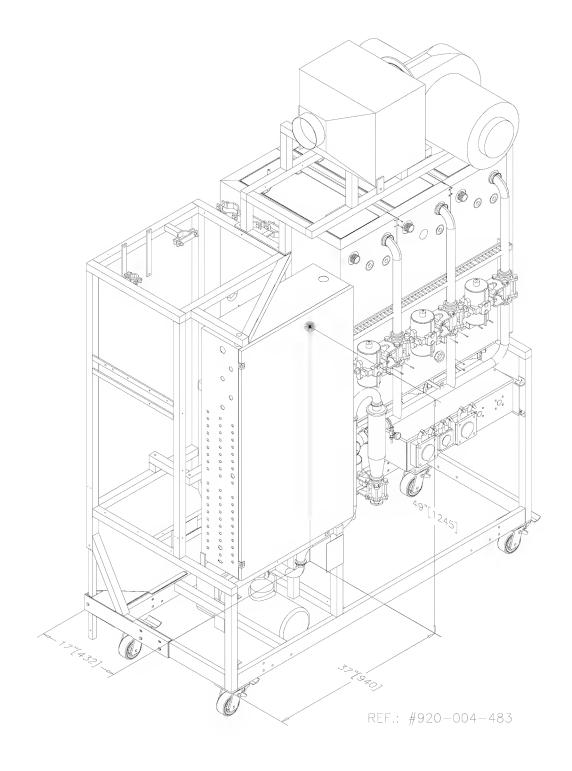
Mobile Mechanical Core - Center of Gravity
